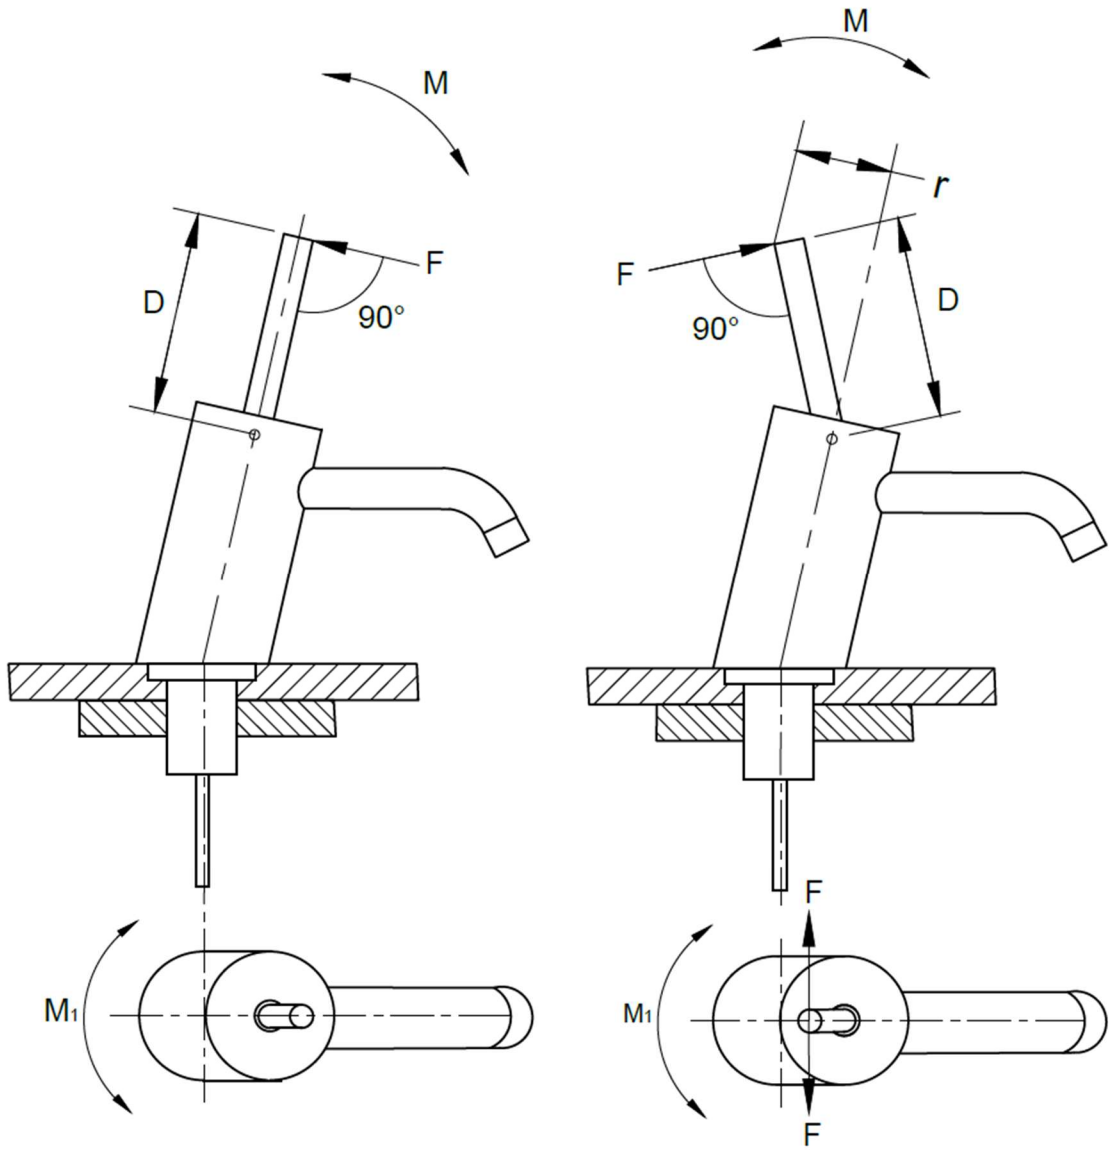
TEST BENCH ADJUSTMENT TORQUE FOR JOYSTICK MIXING VALVE
